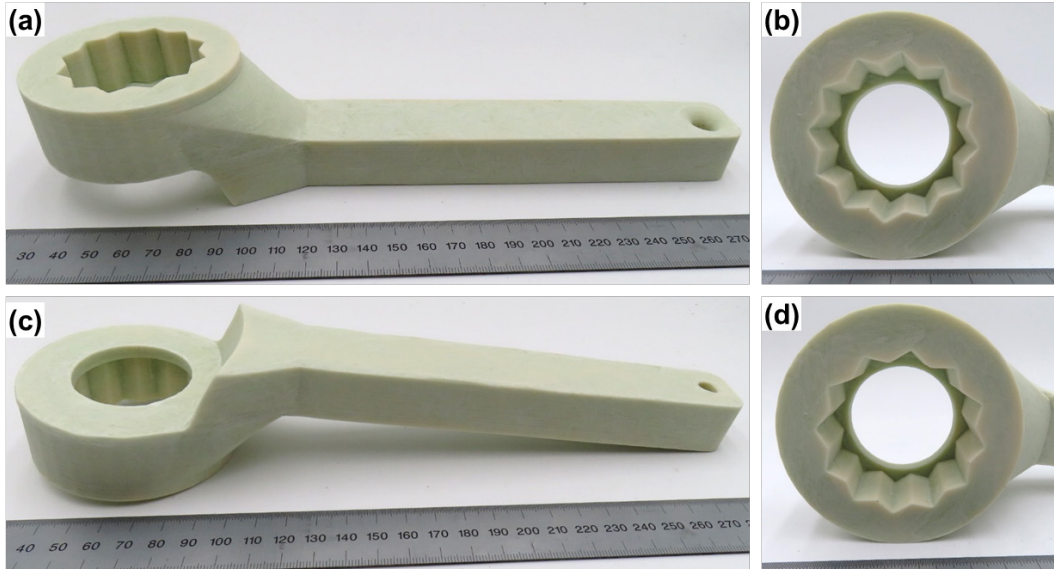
Fabricated electrically insulating wrench: (a) bottom view, (b) head, (c) top view, and (d) head.
